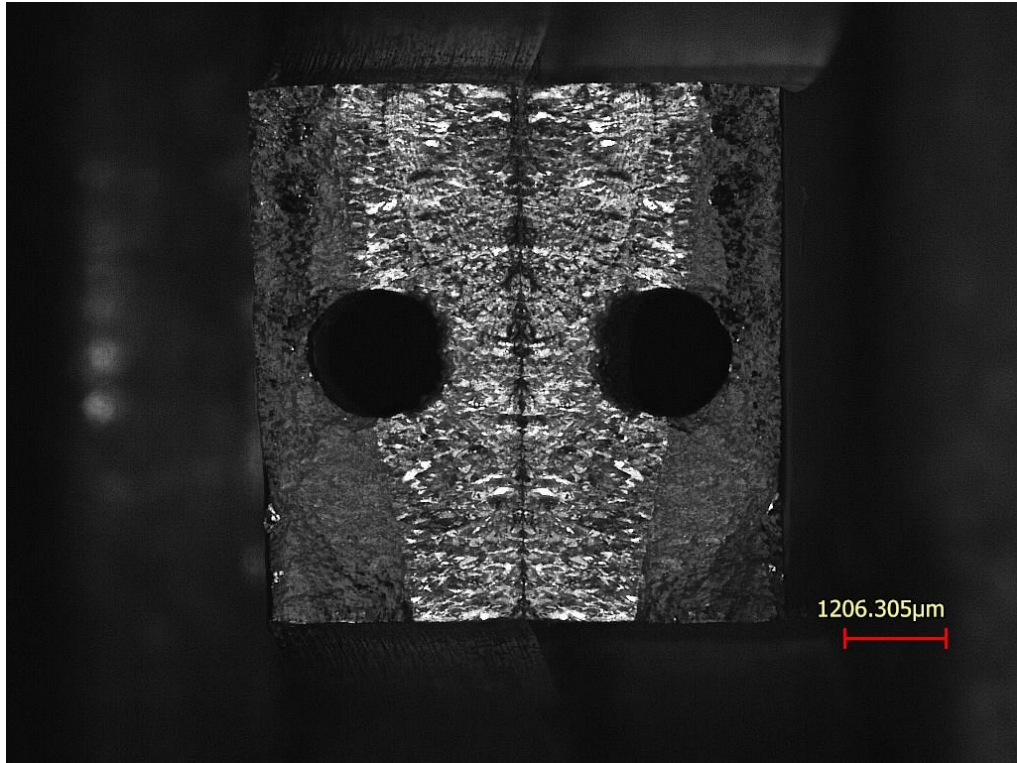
Specimen D1 fracture surface (10,000,000 cycles : 59.70 ksi / 411.6 MPa)
